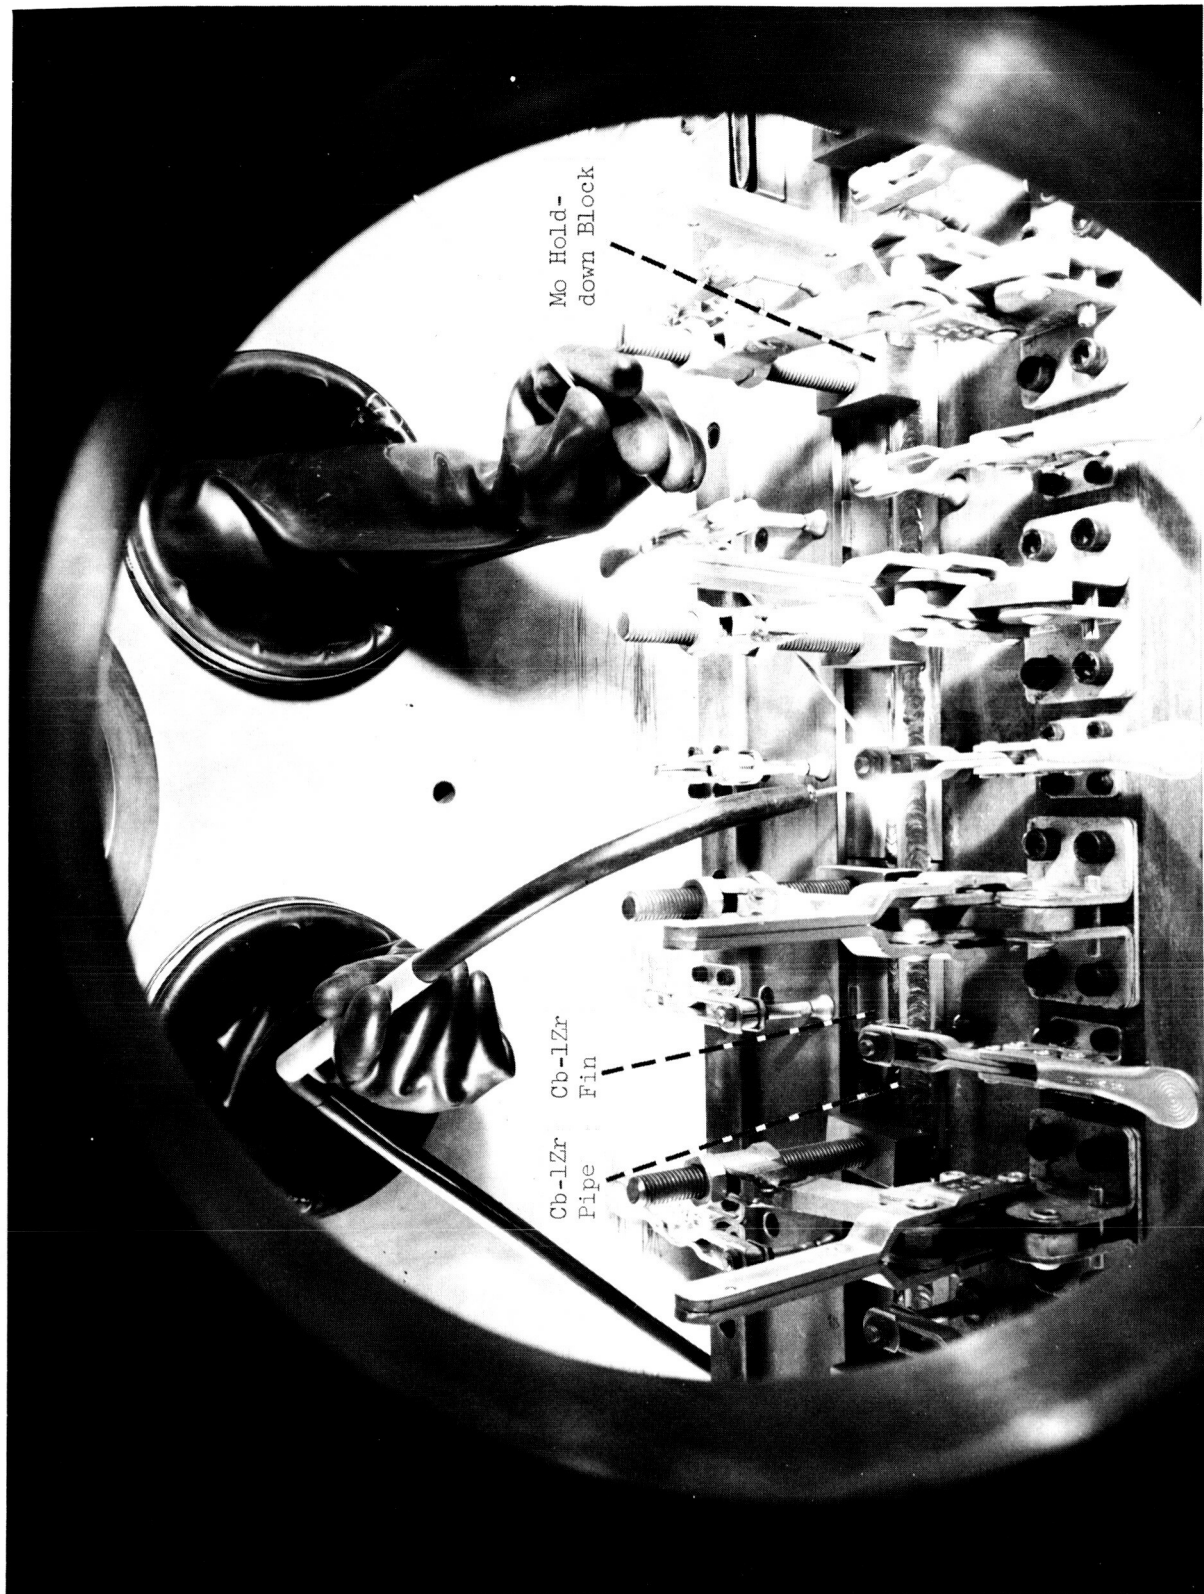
Cb-1Zr corrosion test loop condenser and fixture during welding of fin to condenser pipe.
